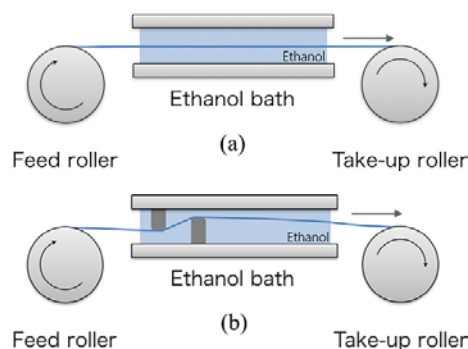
Schematics of (a) continuous cold drawing system in ethanol channel and (b) drawing system equipped with pin.
